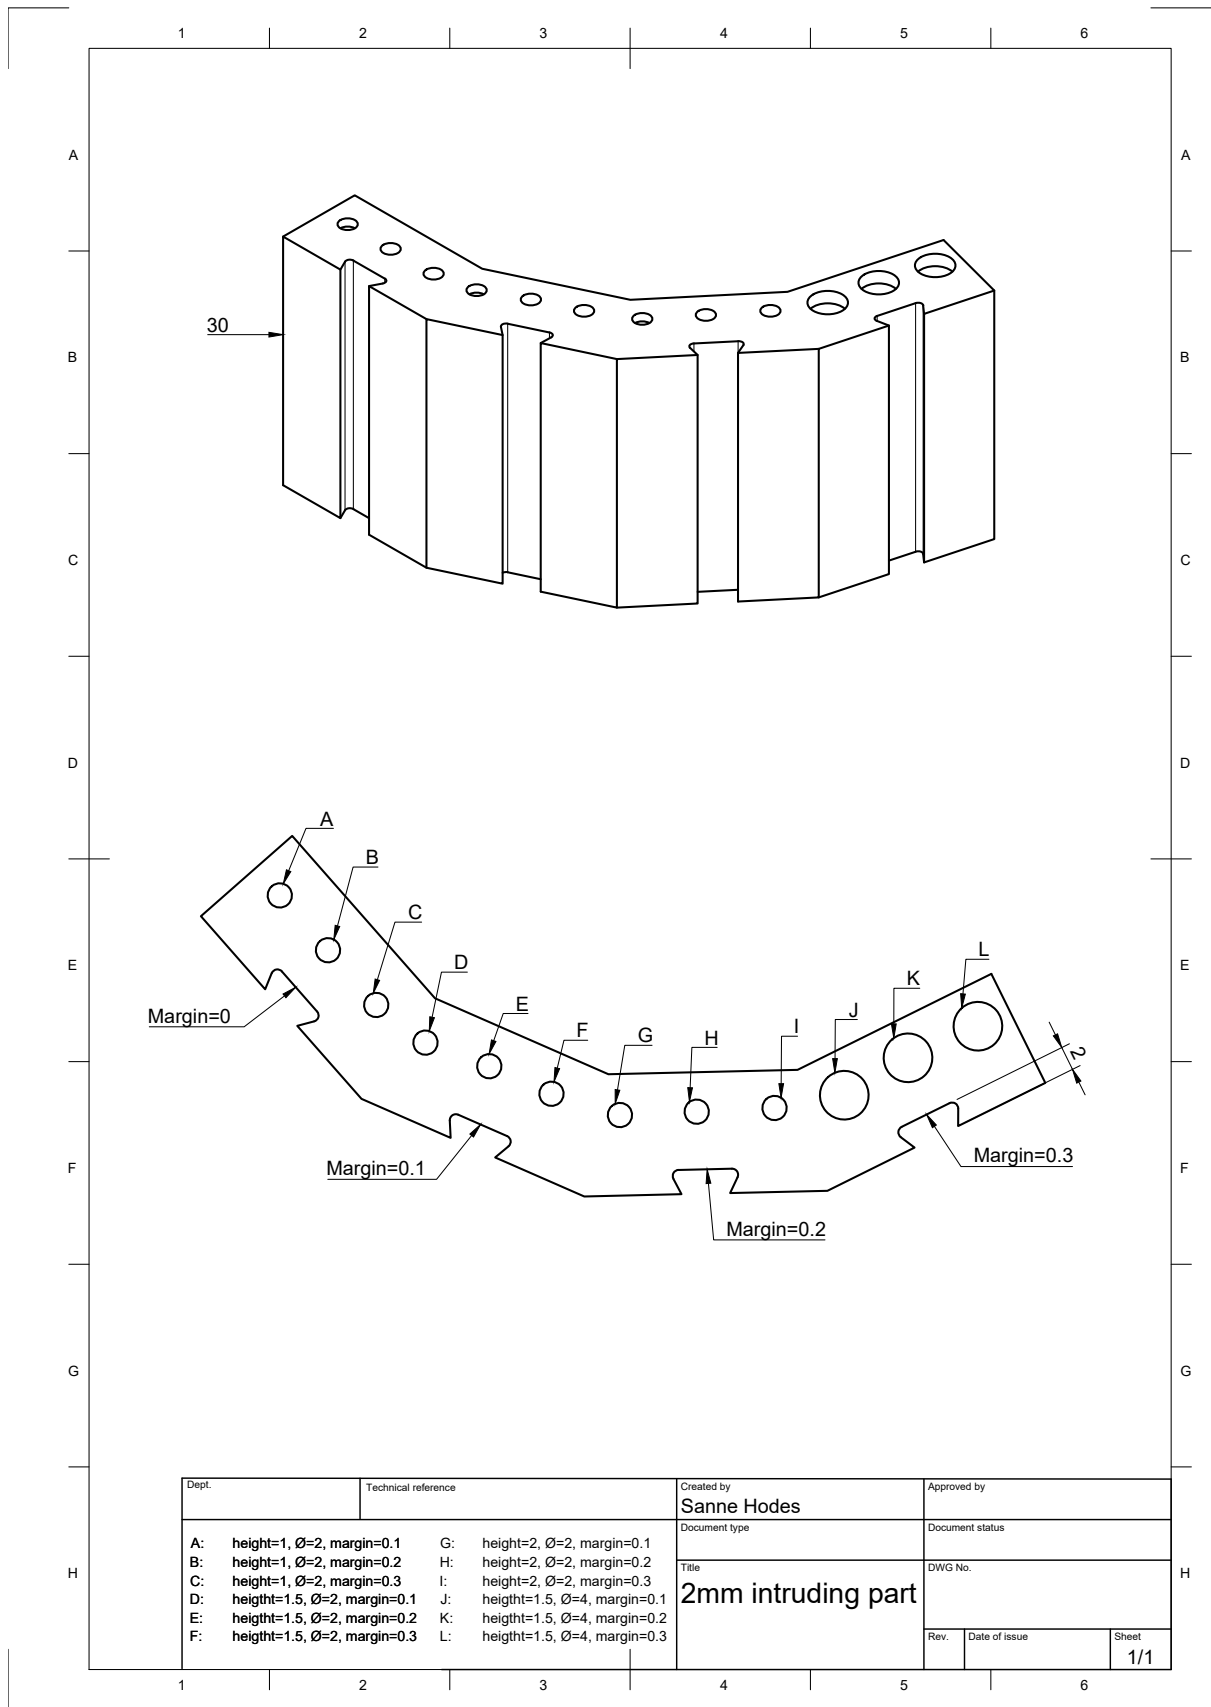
Technical drawing of the test cube with the 2 mm intruding part
